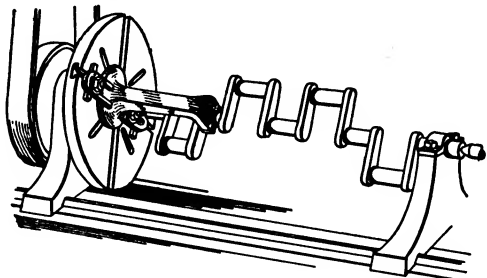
Lathe Set-Up for Lapping Crankshaft Pins
